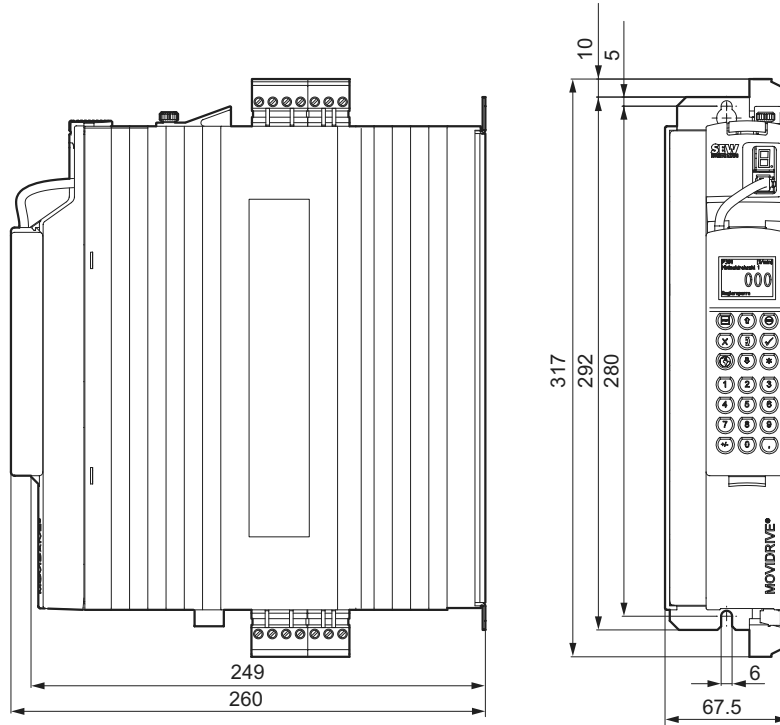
Dimension drawing for MDX60B size 0M, dimensions in mm
